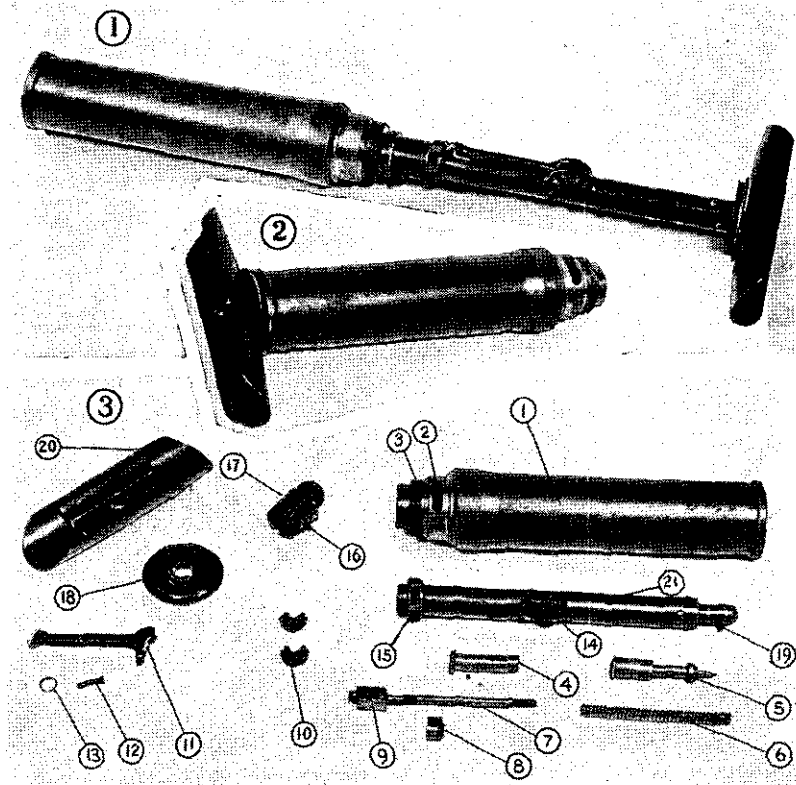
Three views of Model 10 (1921) 50-mm grenade discharger: ① assembled, ② assembled for carrying, and ③ disassembled.
